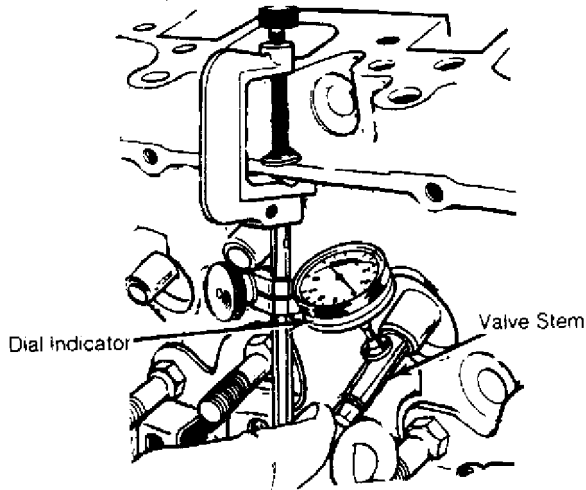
Measuring Valve Stem-to-Guide Clearance - Typical
